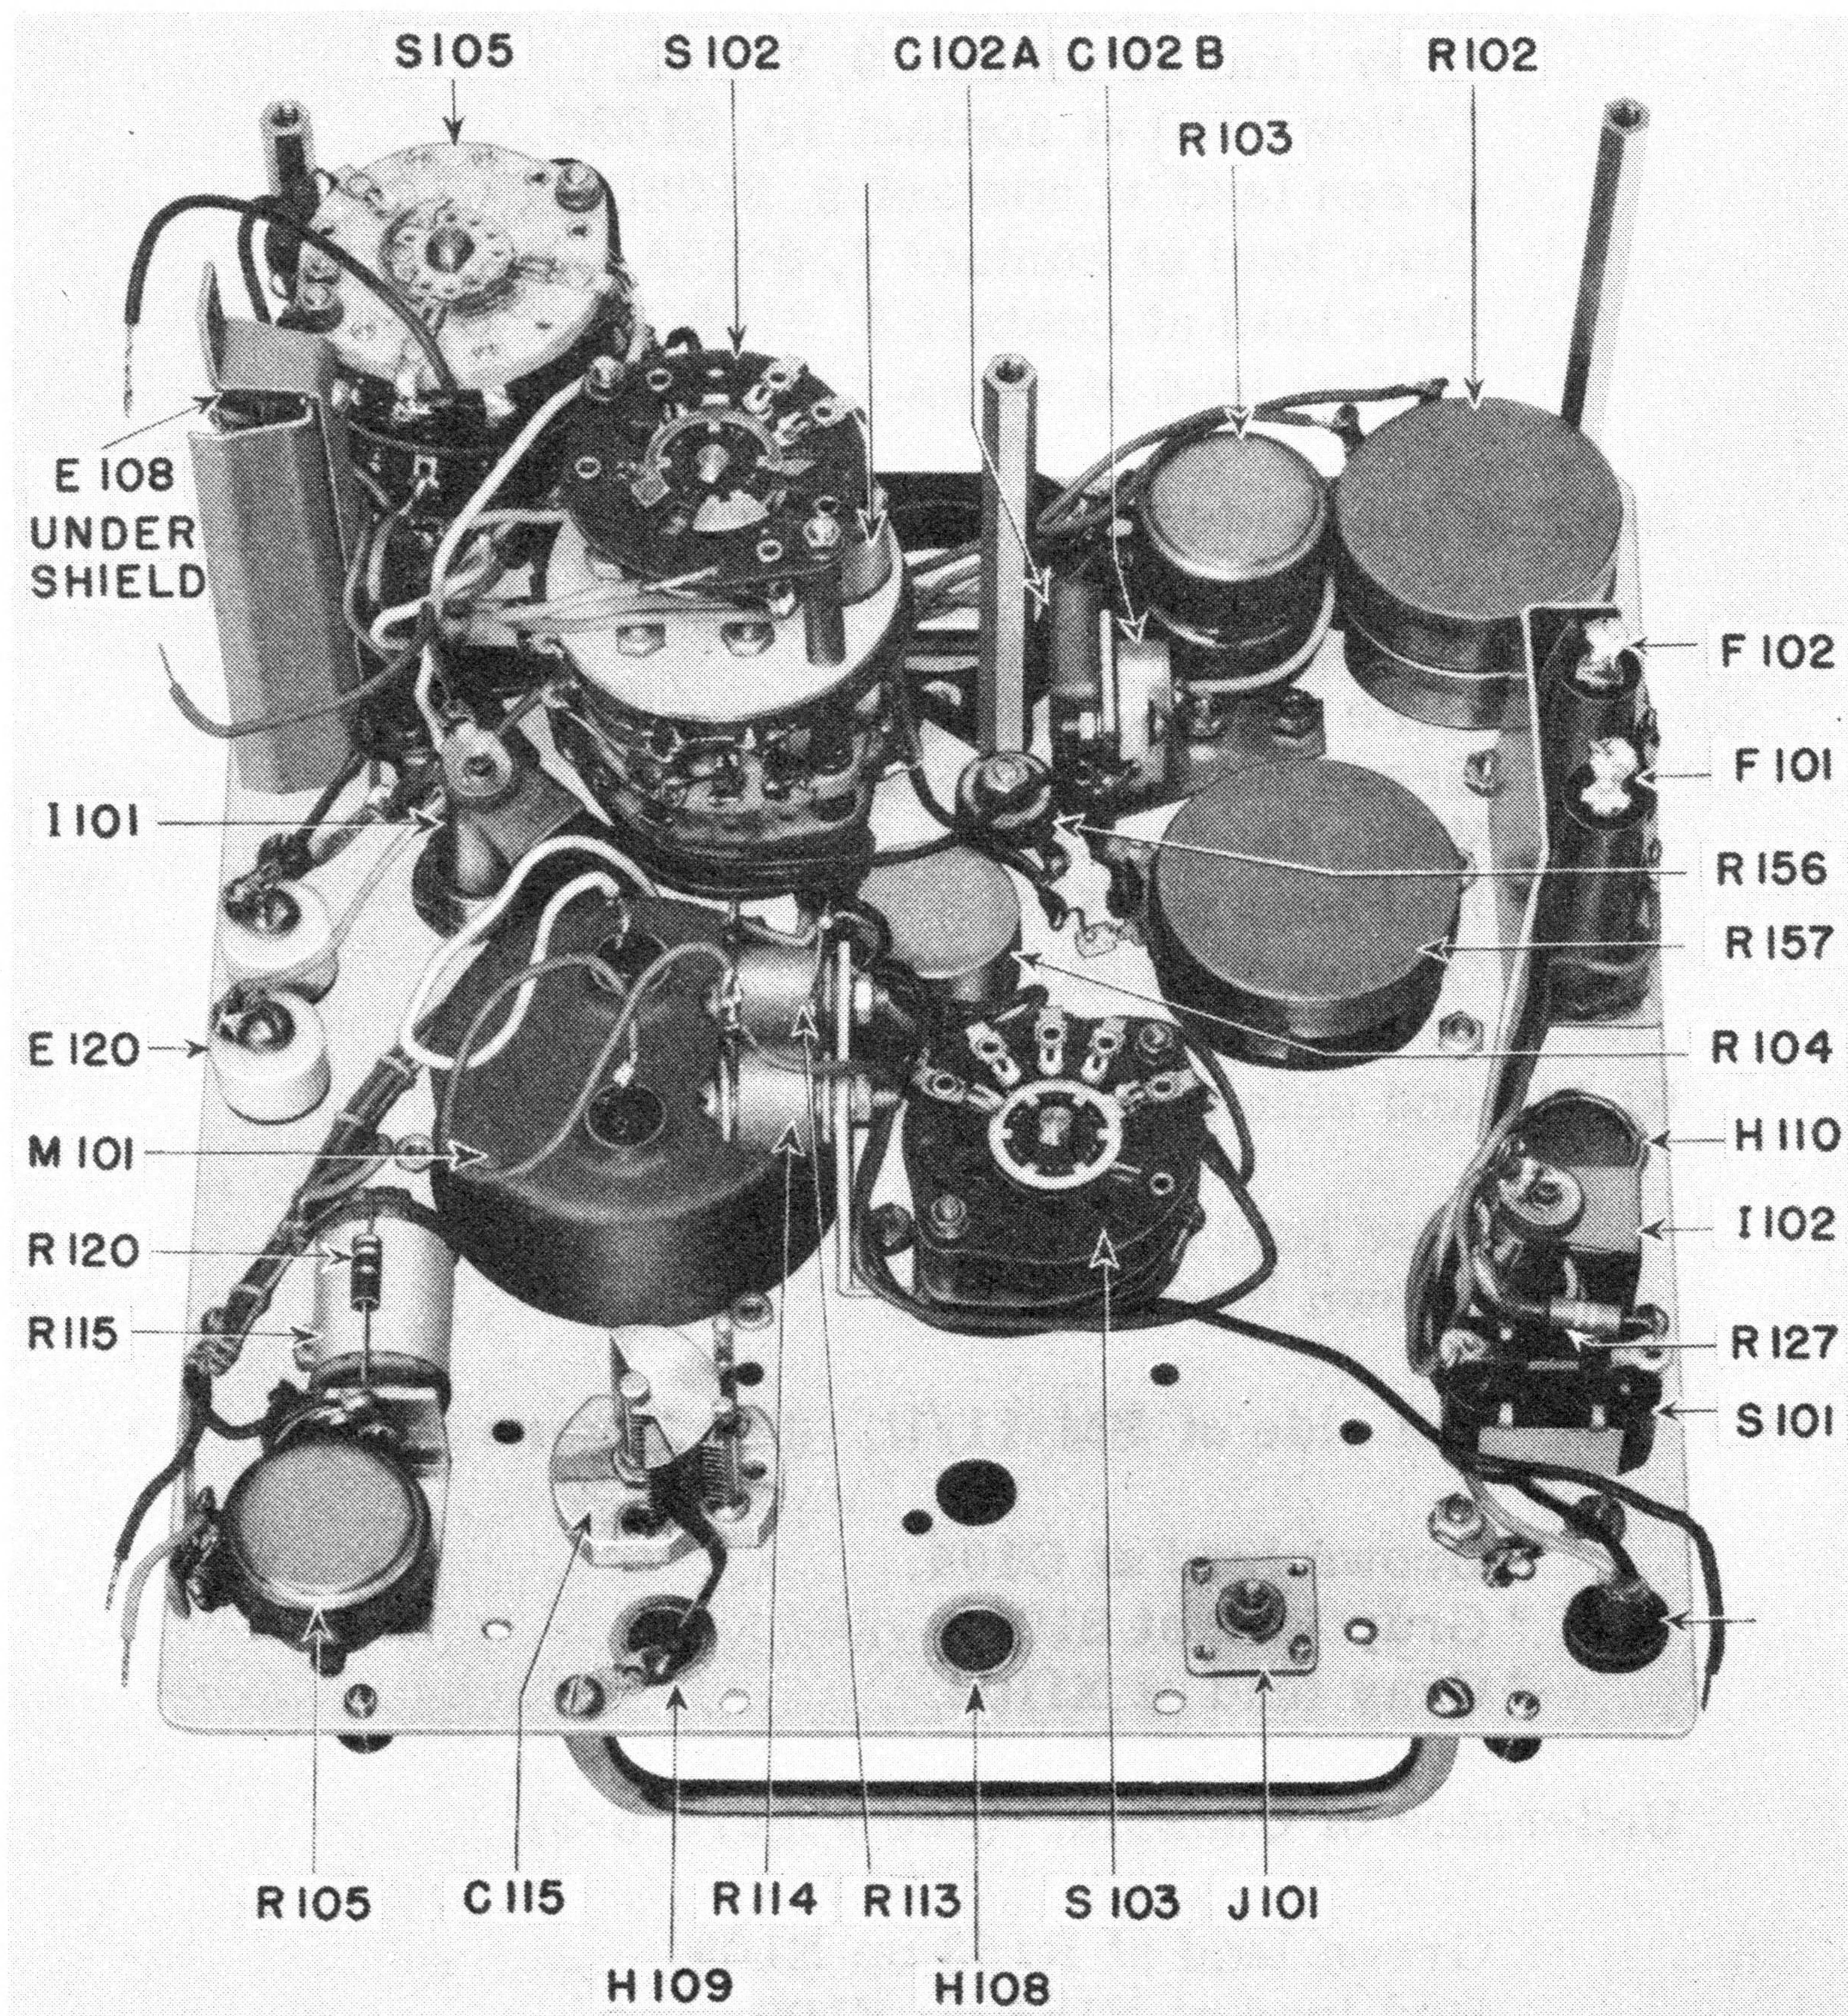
Bridge, ZM-11/U, Panel Assembly, Unsandwiched.
